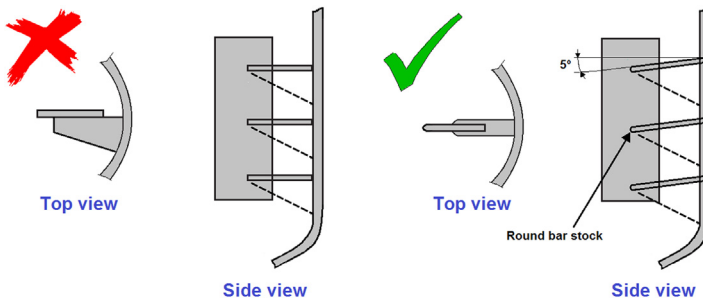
The internal support members to fasten the baffles to the tank wall must be made from solid round bar stock having a downward slope of 5 degrees. When gaps are left between baffle and tank wall, the flow allows the baffles and the tank wall to be cleaned more easily (ASME BPE committee, © 2014).
